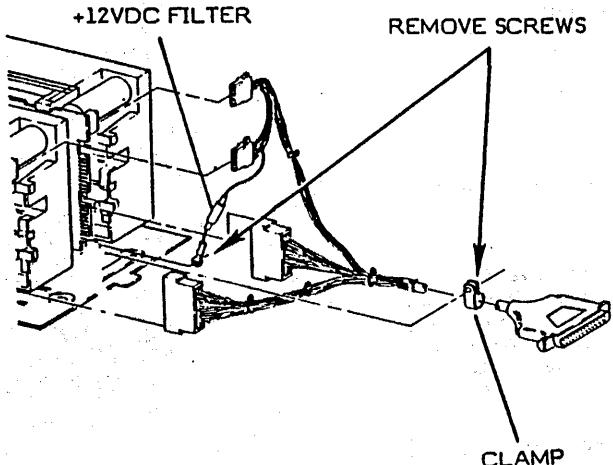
DISK DRIVE HARNESS REMOVAL
